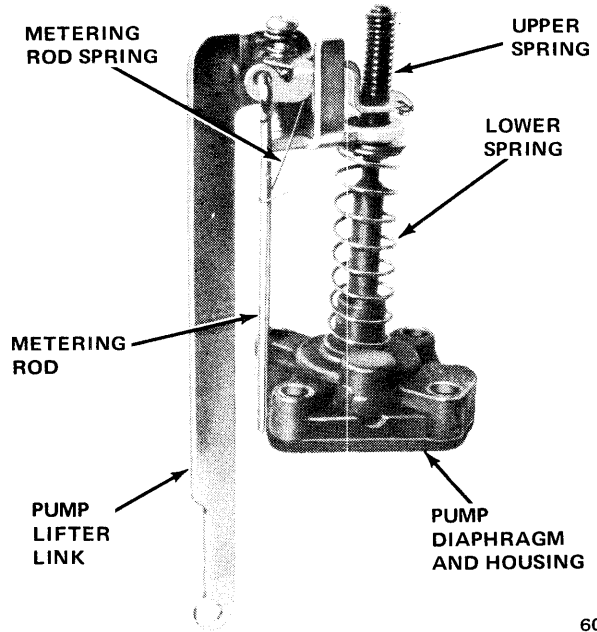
Accelerator Pump and Metering Rod Assembly
